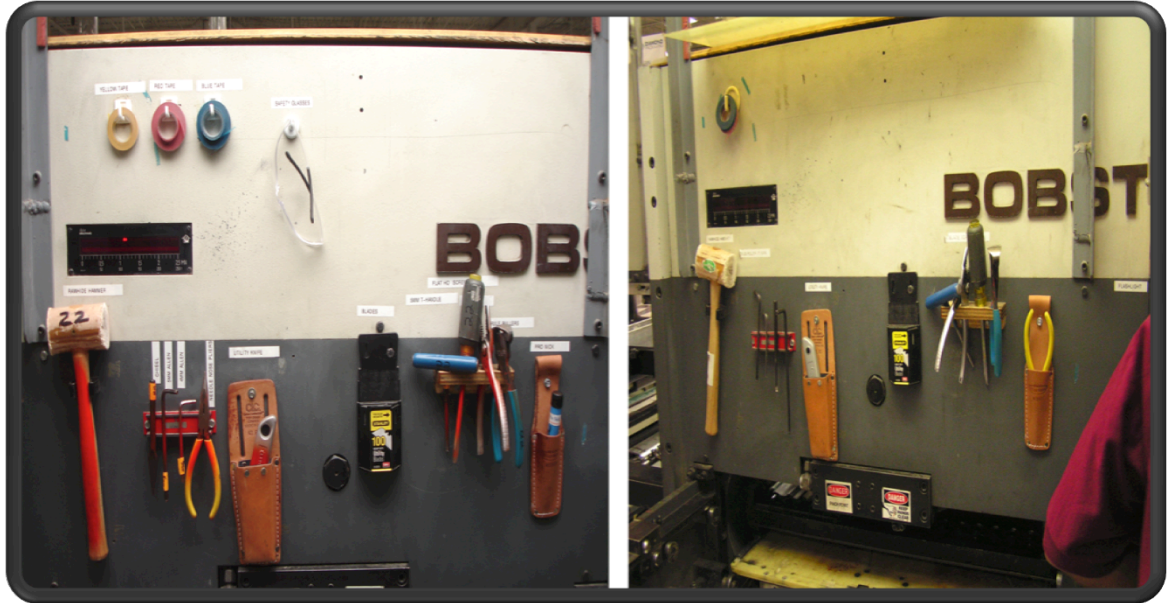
5S Process, Before (right) and After (left) of Machine Tools Operator Side
